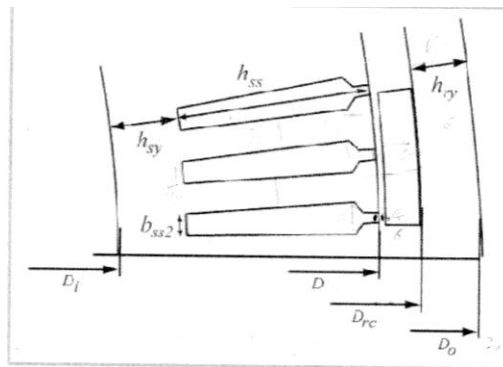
Basic dimensioning of outer rotor BLDC motor
